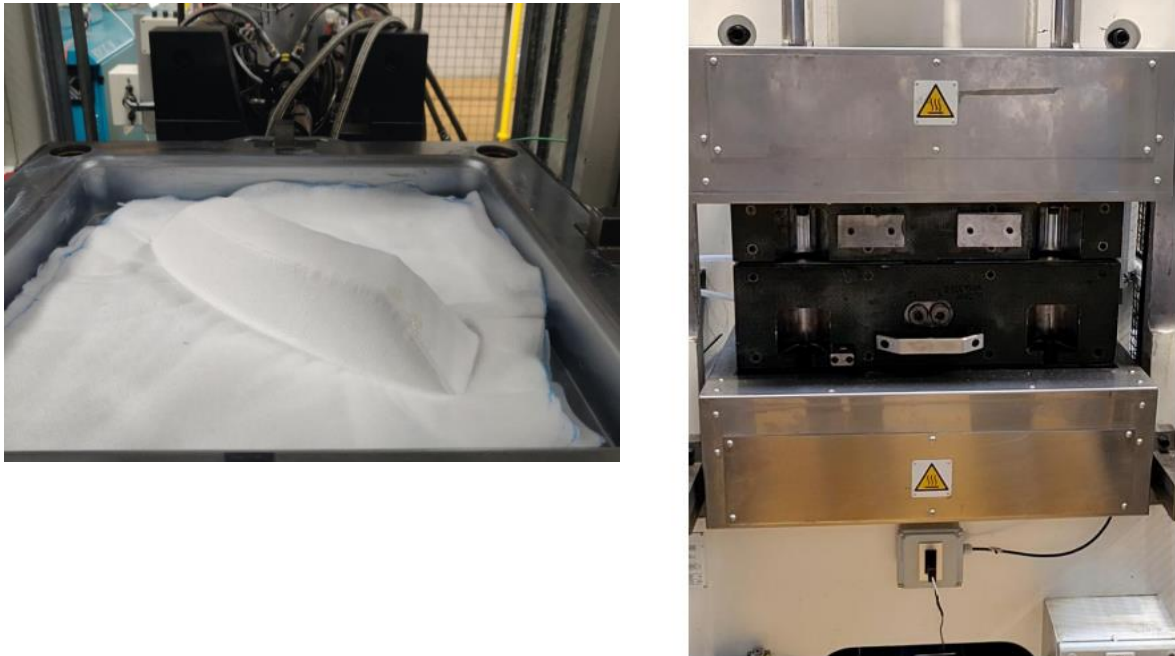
Manufacturing steps: Preforming of self-reinforced PLA non-woven fabrics (left); Partial closing of mould at room temperature (right)
